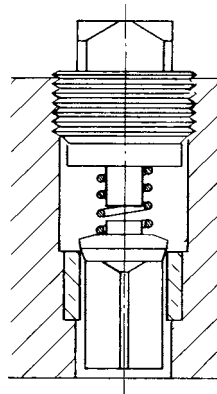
Reciprocating pump conical-faced (bevel-seat) wing-guided valve.
